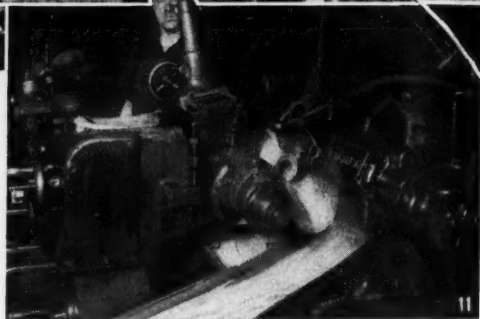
A spline shaft in process of hobbing. Fig. 10—Milling flats on connecting rod bolts, using a Milwaukee vertical miller with a rotary fixture. Fig. 11—Piston pins, steel bushings, and other small cylindrical parts are ground in the centerless grinding machine.
